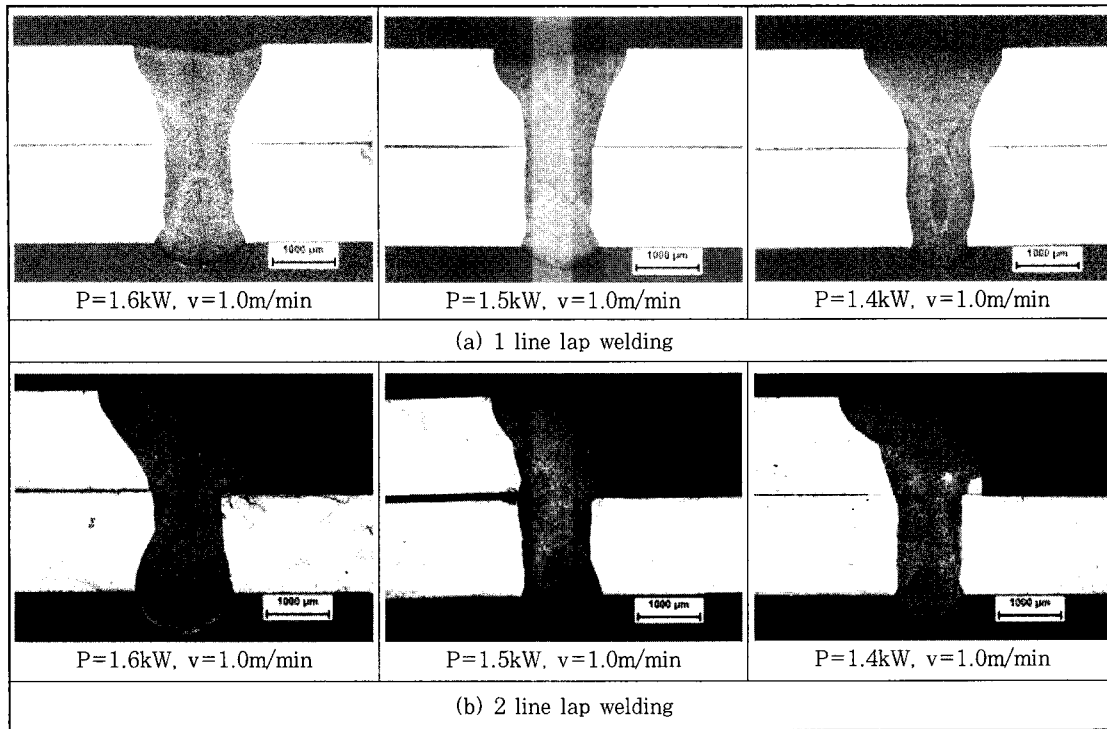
Cross sectional area of weld bead after lap welding
